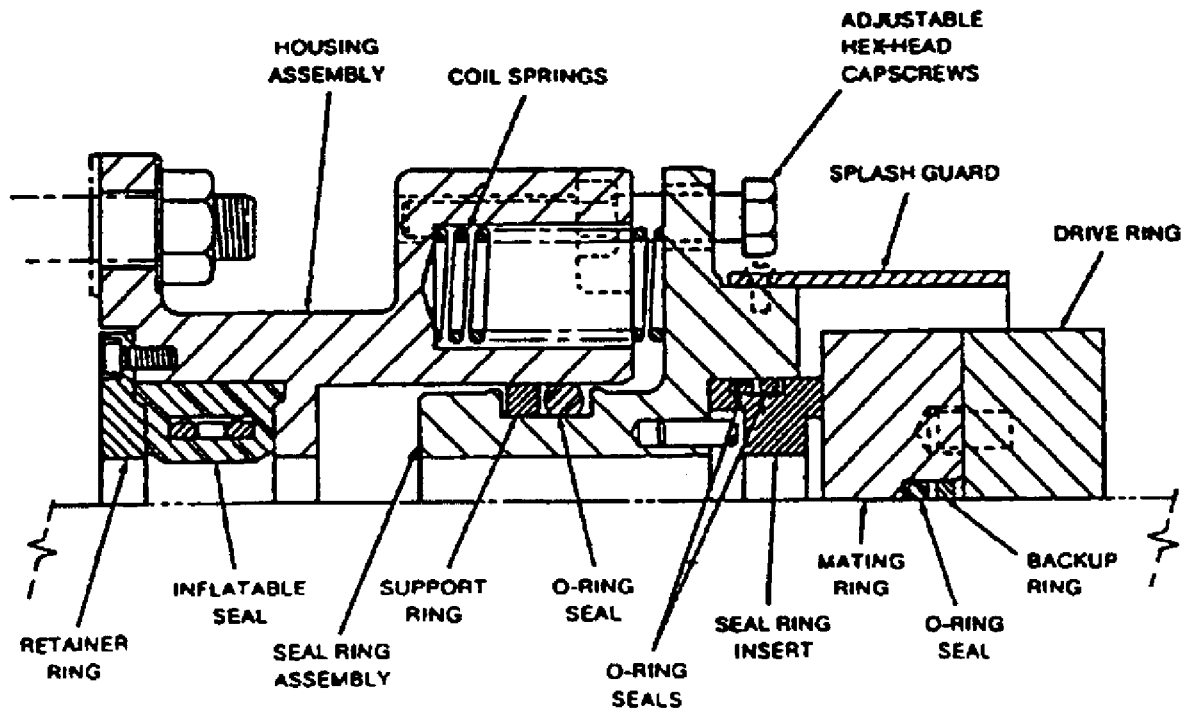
EG&G Sealol Stern Tube Seal Assembly
